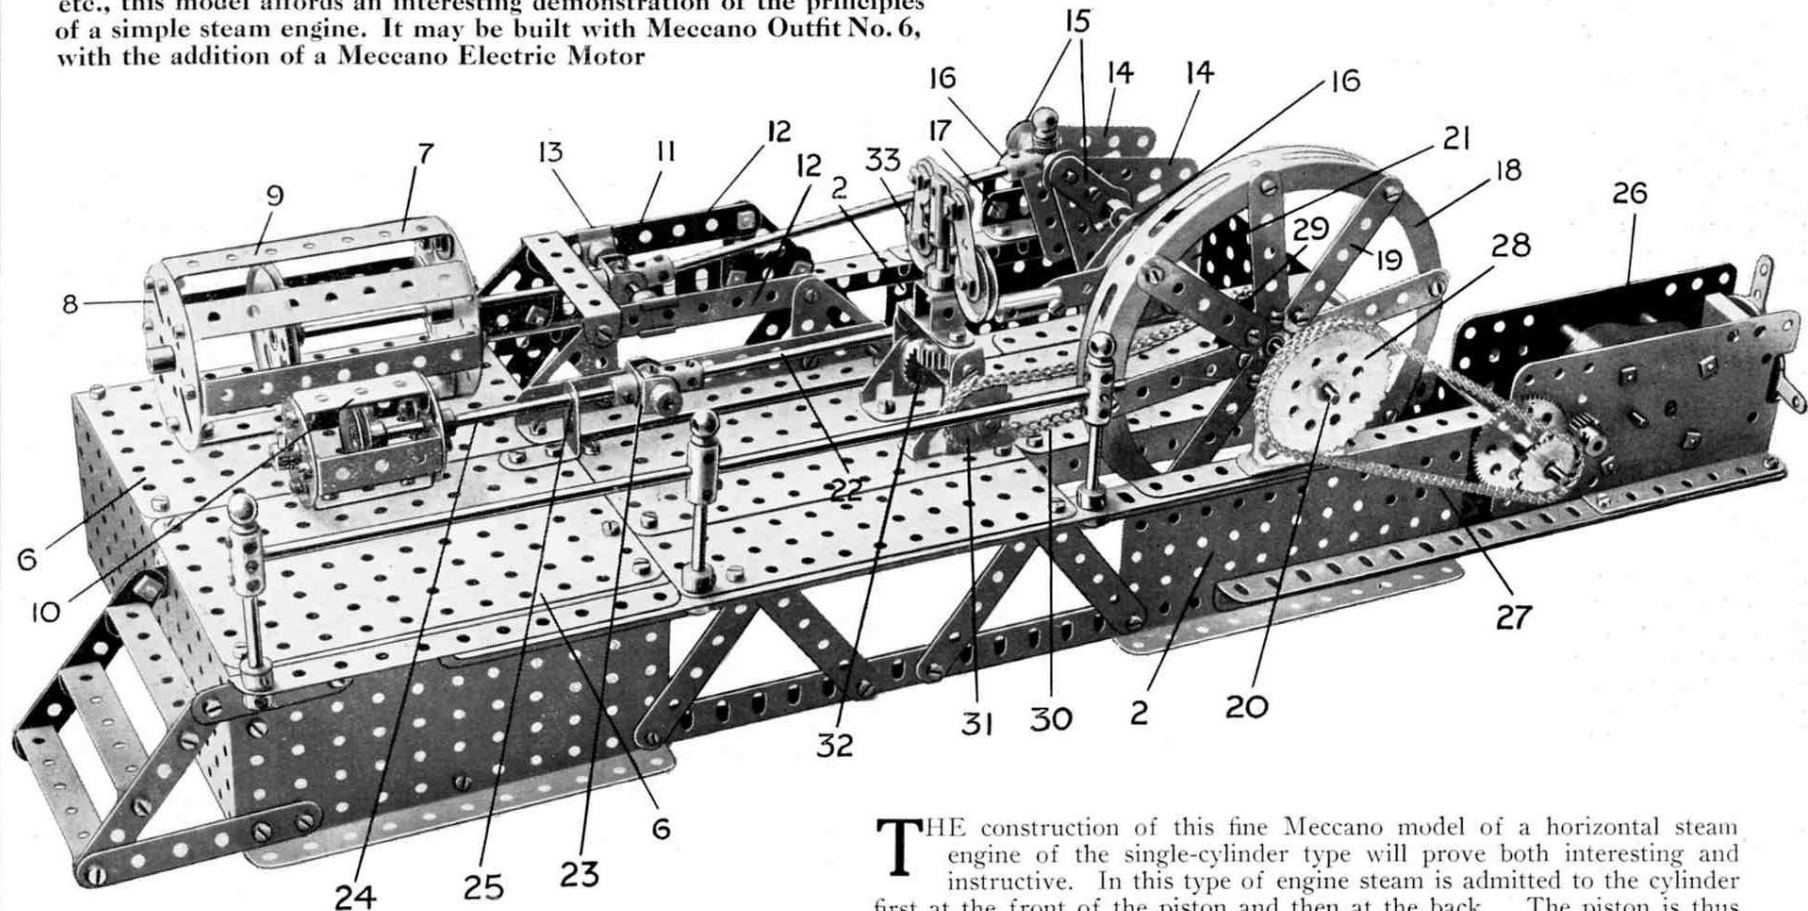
General view of the Steam Engine, showing the method of coupling the Meccano Electric Motor to the crankshaft
